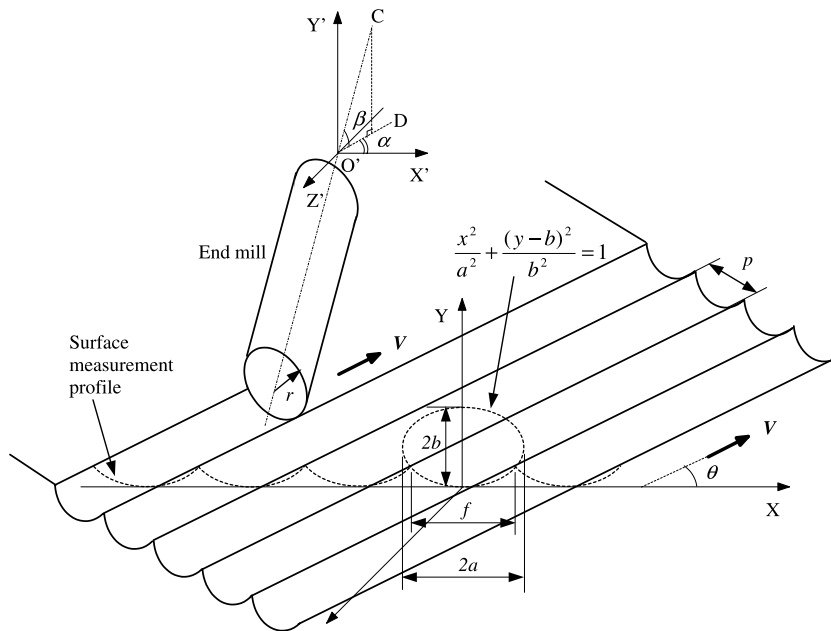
Measurement profile on the surface machined by flat-end milling.
